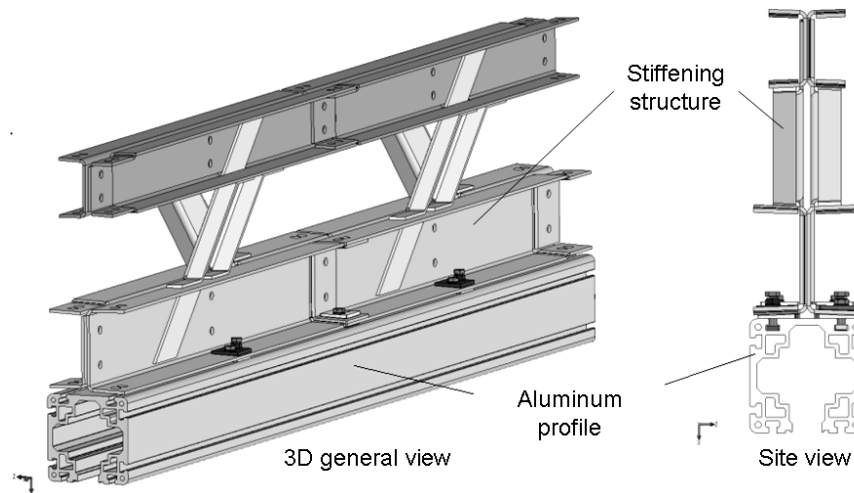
3D CAD modell of the aluminium load-bearing console with FRPC-stiffener structure in X assembly
